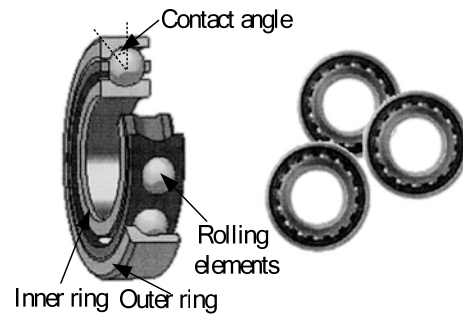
Angular contact ball bearings (McInerney and Dai, 2003).
